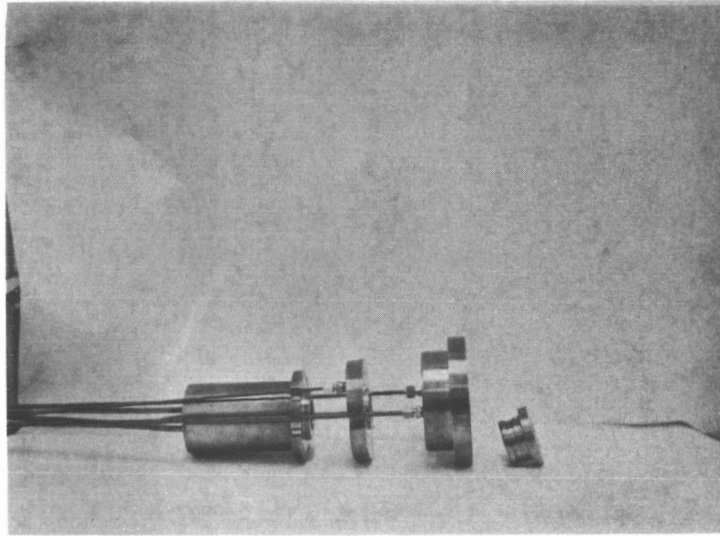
Exploded View of Mark VA-S Engine.
